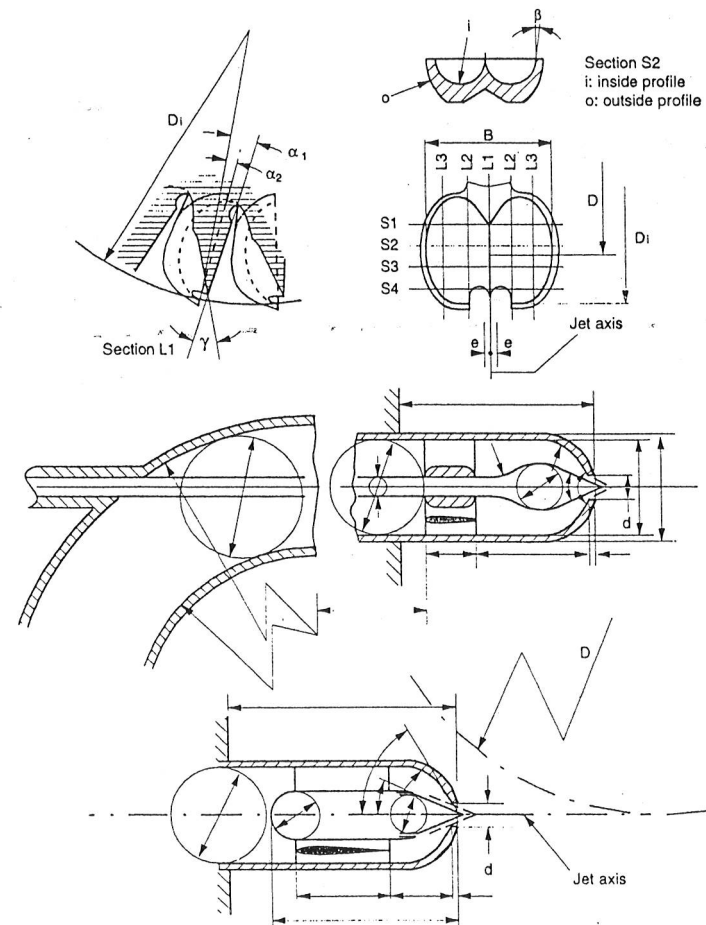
Pelton turbine: Example of dimensions to be checked on the buckets and nozzles
